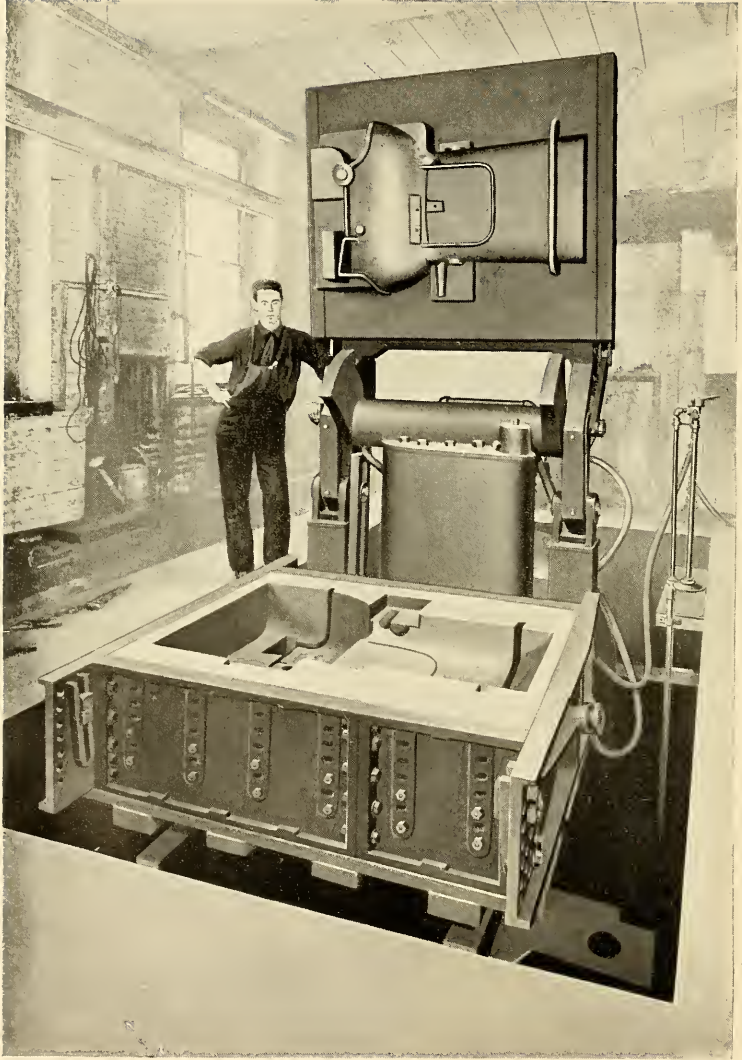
shows a grinder frame mold made on the plain combination machine. This half mold was made by two men in ten minutes and a complete mold, including core setting, could be made in half an hour.
